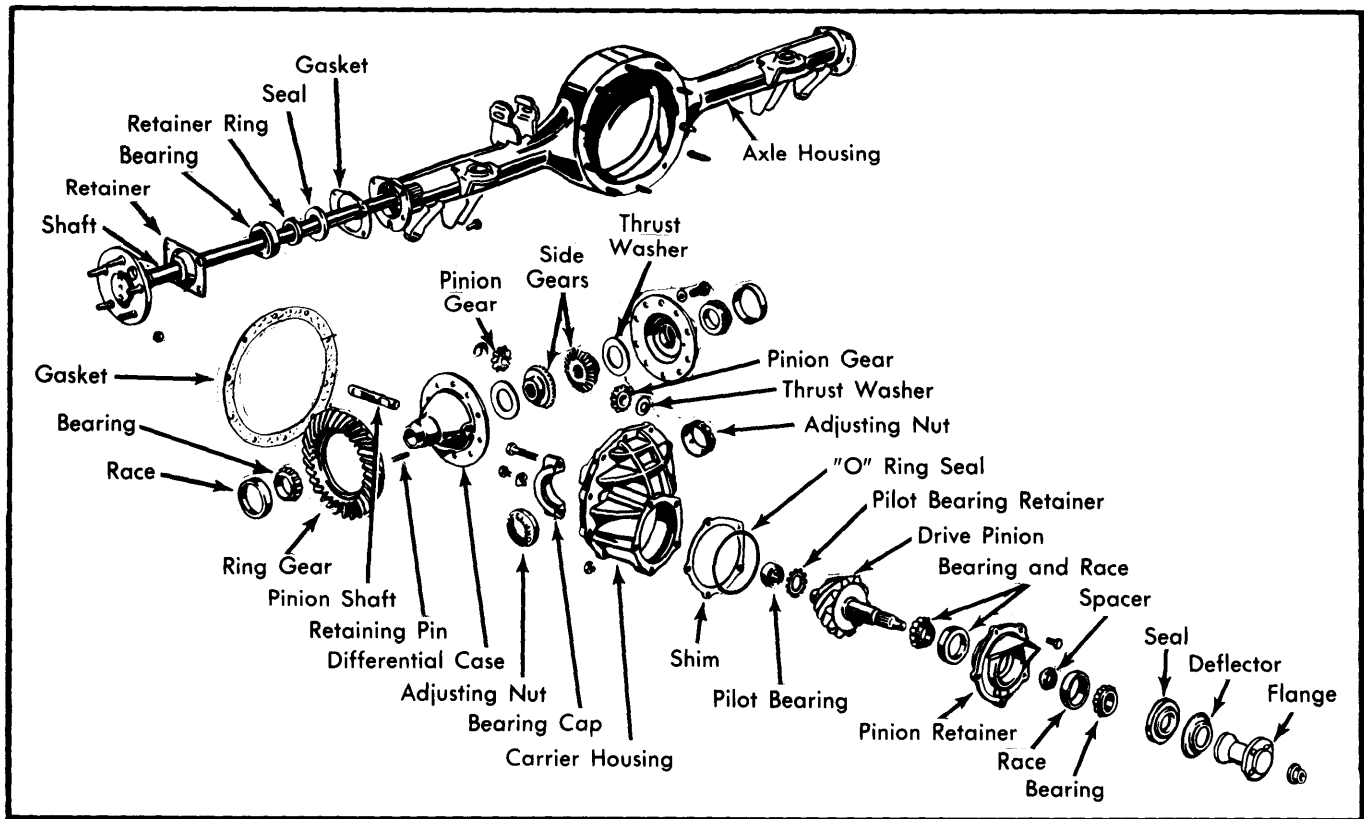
Exploded View of Ford Motor Co. Separate Housing Axle Assembly
